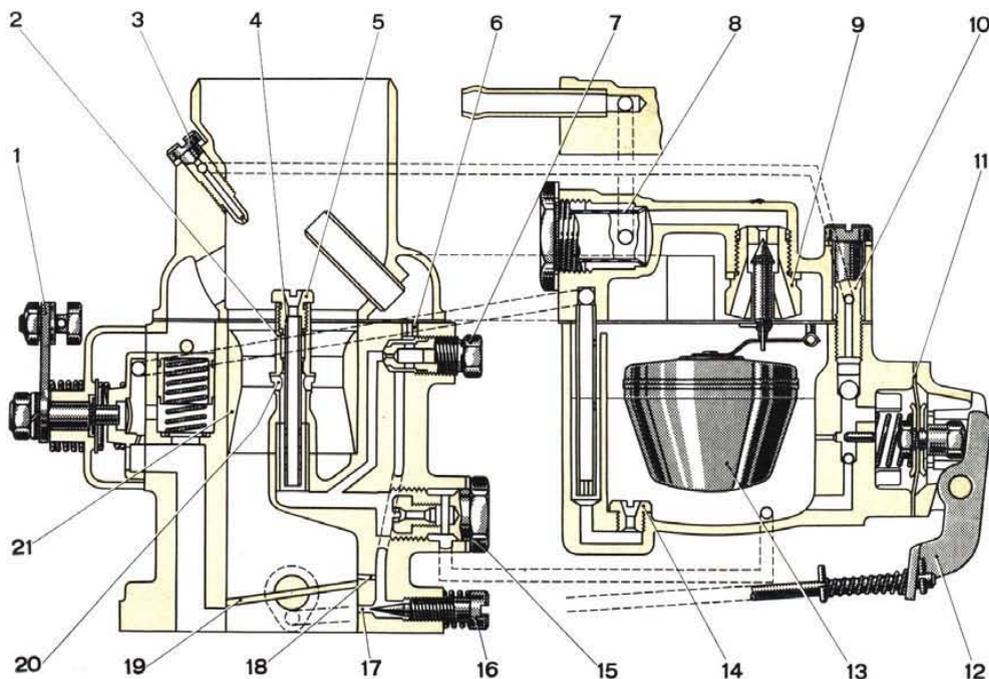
Diagrammatic section view of Solex « 30 PIB 4 » carburetor.
